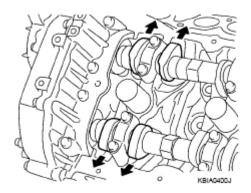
Checking Intake And Exhaust Cam Lobes Of No. 1 Cylinder
